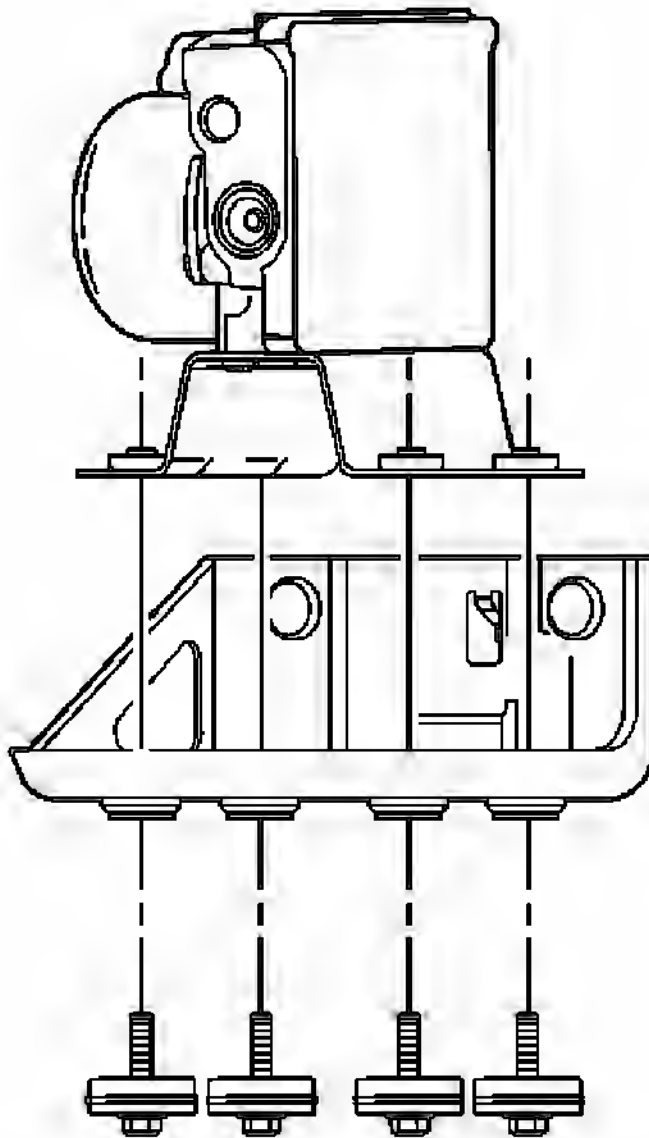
View Of 4 Insulator Bolts On Brake Pressure Modulator Valve Bracket
